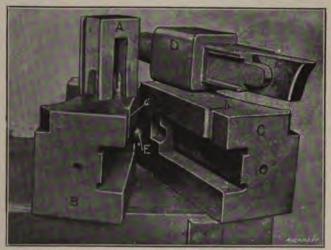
Dies and Tools used for forming a Driver Brake Adjusting Rod Block in a 5-inch Ajax Forging Machine
